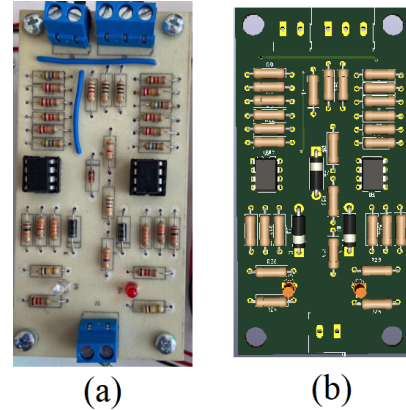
Designed (a) & assembled (b) PCBs of the control unit.
